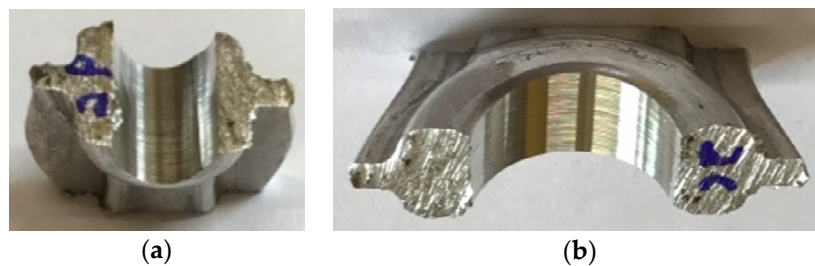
Cut connecting rod and study zones: (a) Bottom of connecting rod; (b) top of connecting rod.
